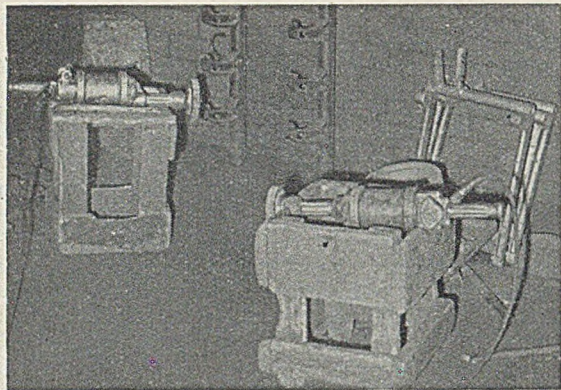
Wooden Stools used in the Old Method of Storing High-speed Portable Grinders. Damage to Machines and Cable was of Frequent Occurrence.
